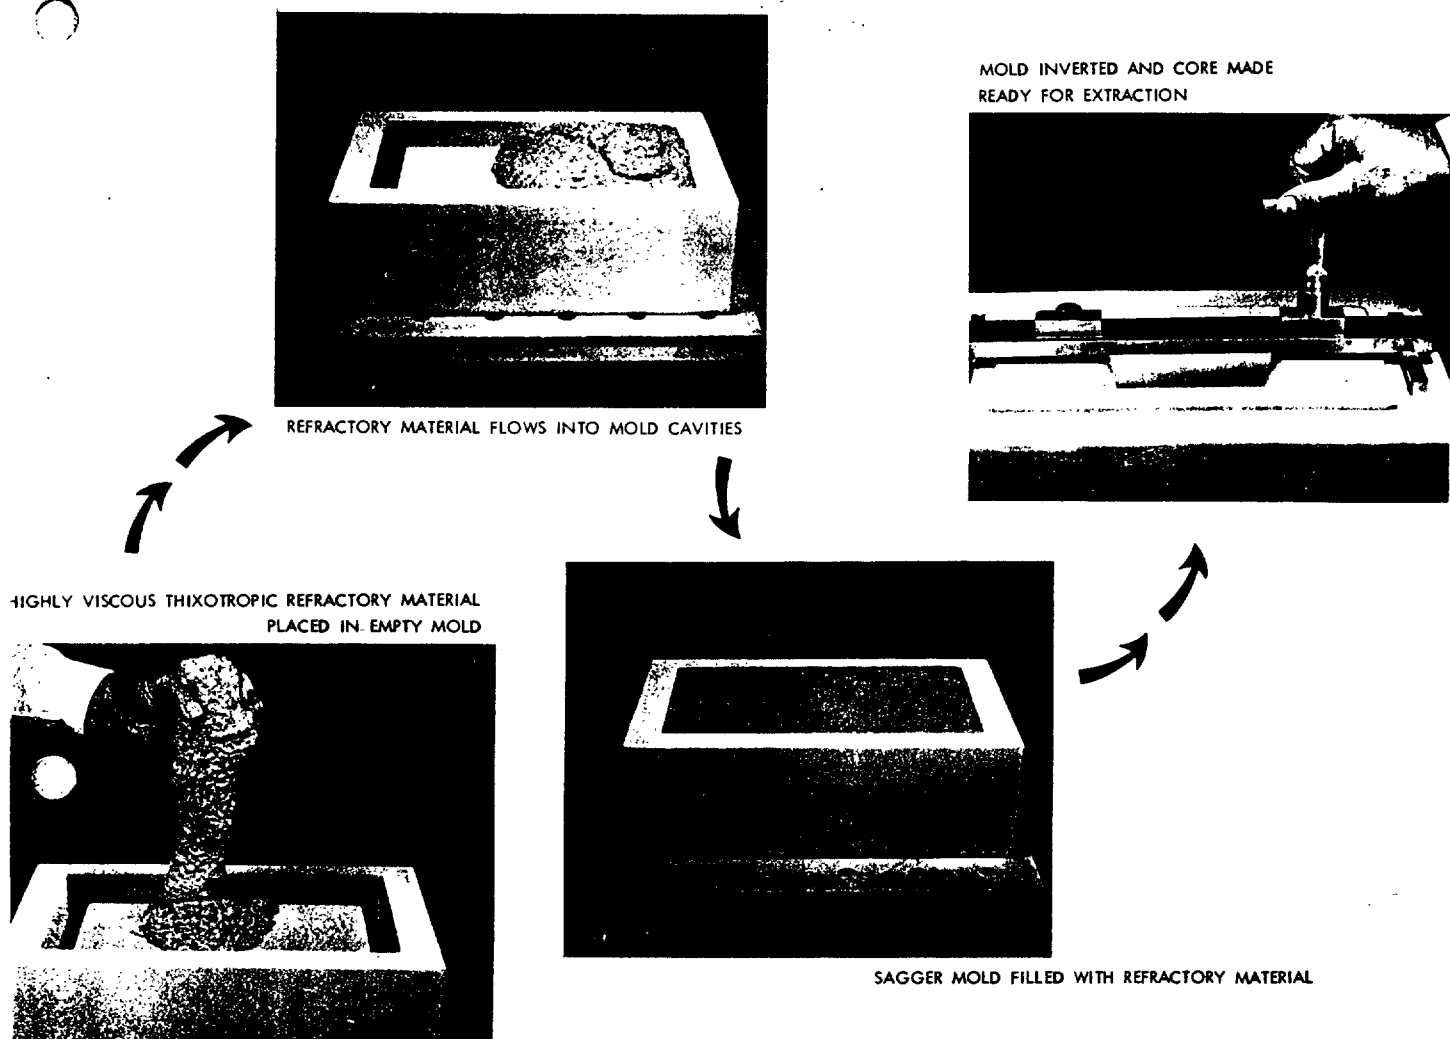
The thixotropic casting process developed by AC Spark Plug Division is used to produce a variety of refractory products. Shown here are the principal steps involved in casting a sagger by the thixotropic method.
